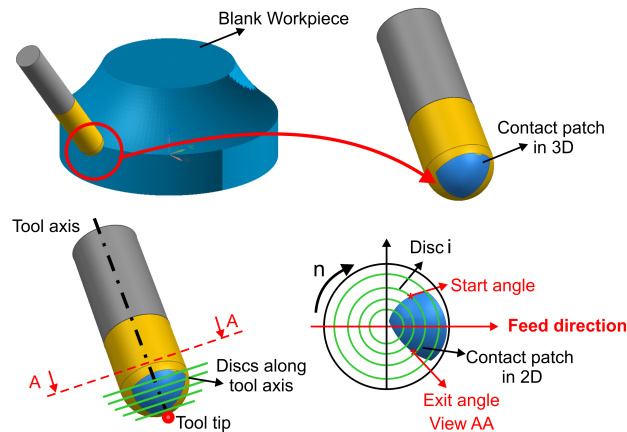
Cutter-workpiece engagement geometry extraction for ball-end mill
